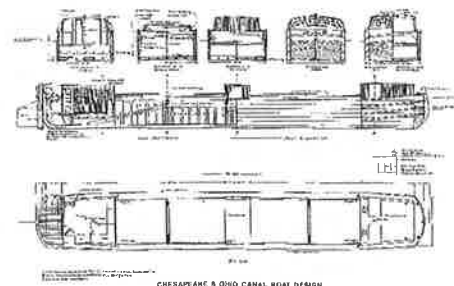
Accurate plans and specifications for the original canal boats show the typical layout that could be replicated for new exhibit and excursion boats. (NPS)
